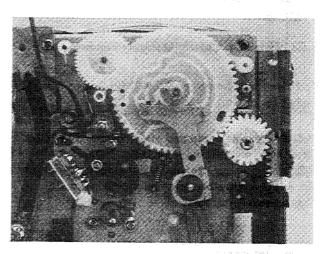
Joint Gear, Arm Gear and Eject Slide Assembly
